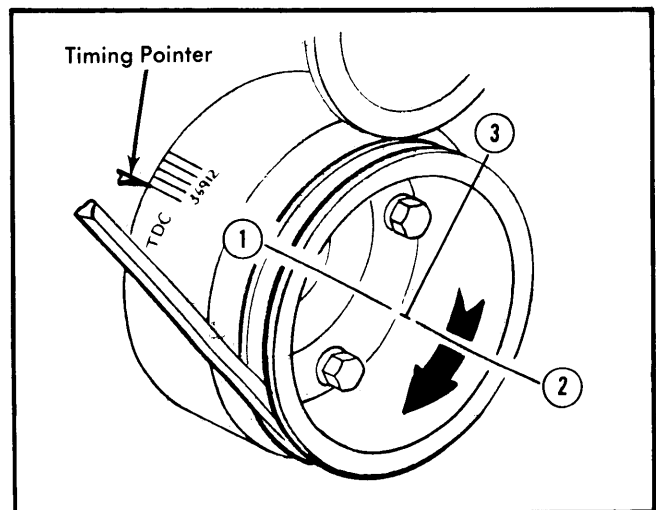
Crankshaft Positions for Adjusting Hydraulic Valve Lifters
